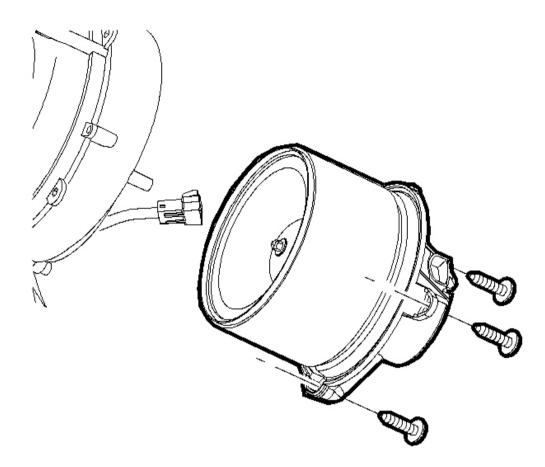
Electrical Connector & Blower Motor Courtesy of GENERAL MOTORS CORP.
